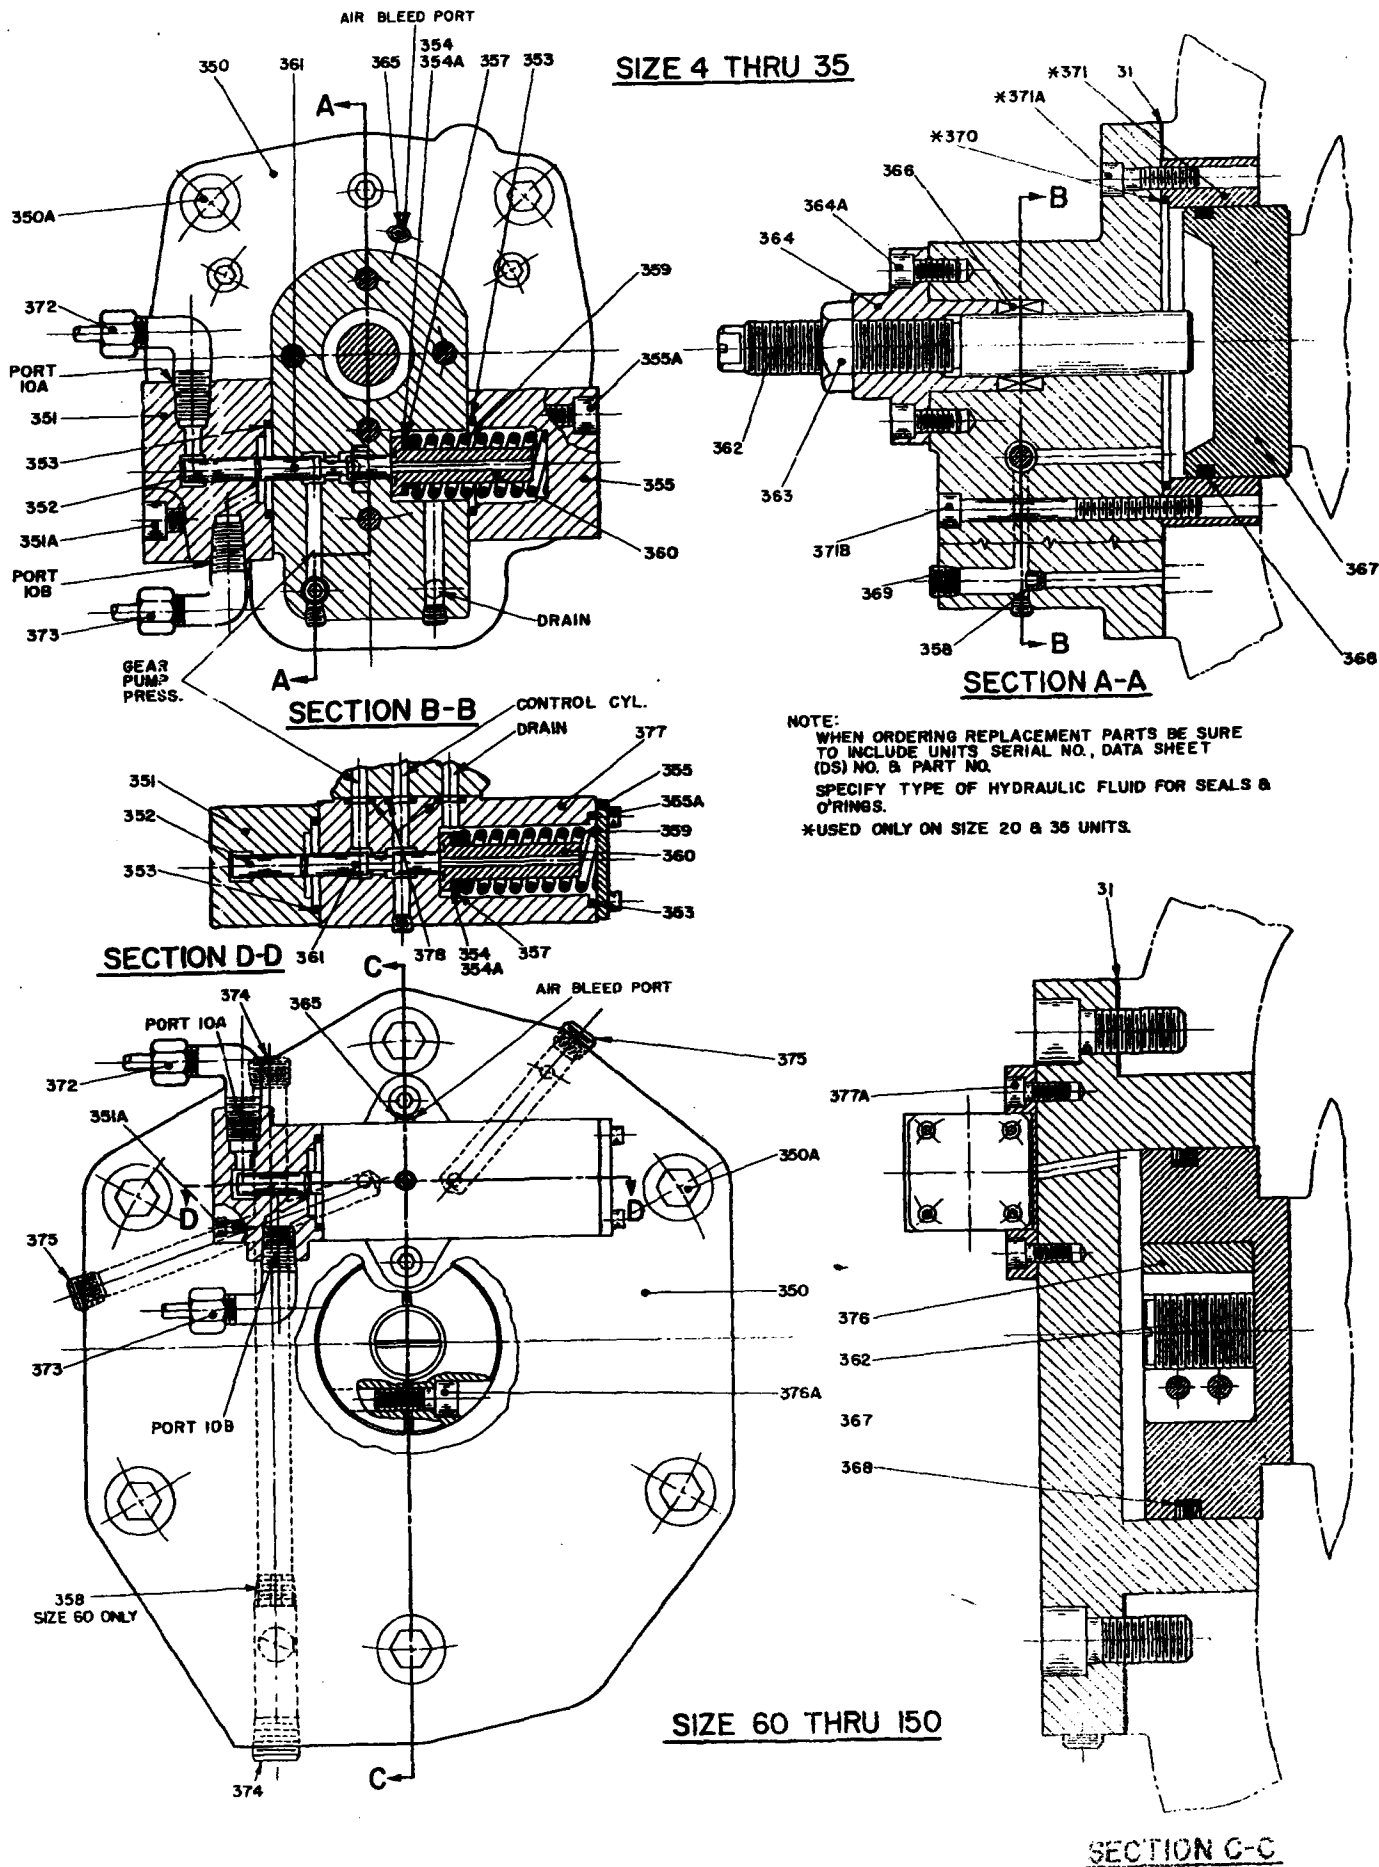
Parts Drawing, Type "C" Opposing Operator DS-947918-B (504968-B).
